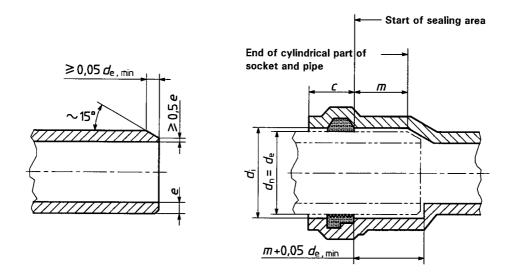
Socket and spigot end for pipes with elastomeric sealing ring
